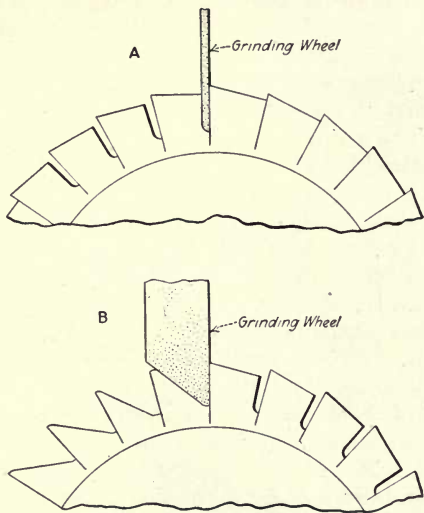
Method followed in re-cutting milling cutters without annealing them.
